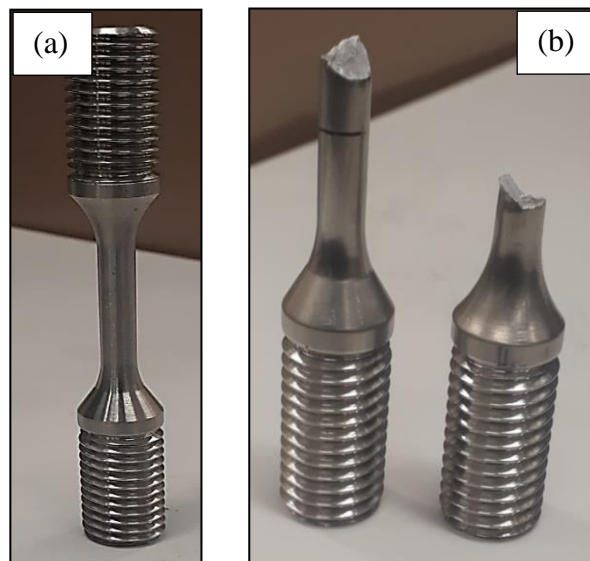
Photographs showing (a) a final prepared fatigue test specimen before testing and (b) the broken fatigue specimen after test.
